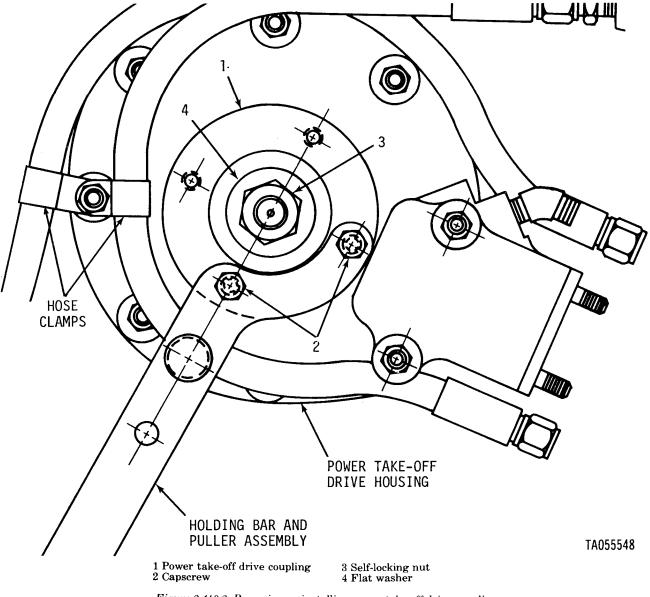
Removing or installing power take-off drive coupling self-locking nut, model AVDS-1790-2DR engine.
